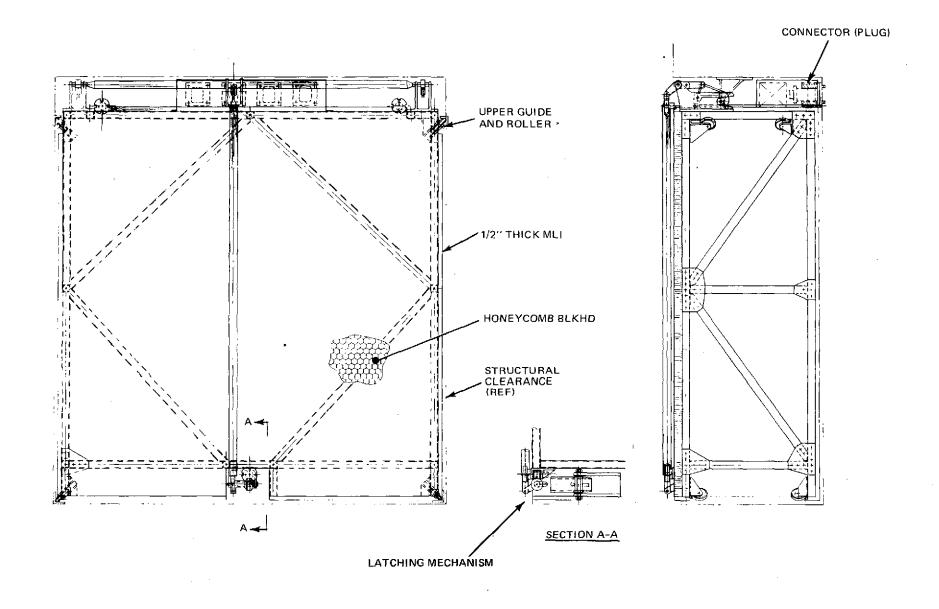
Subsystem Module Structural Assembly Showing Latching Mechanism Detail
